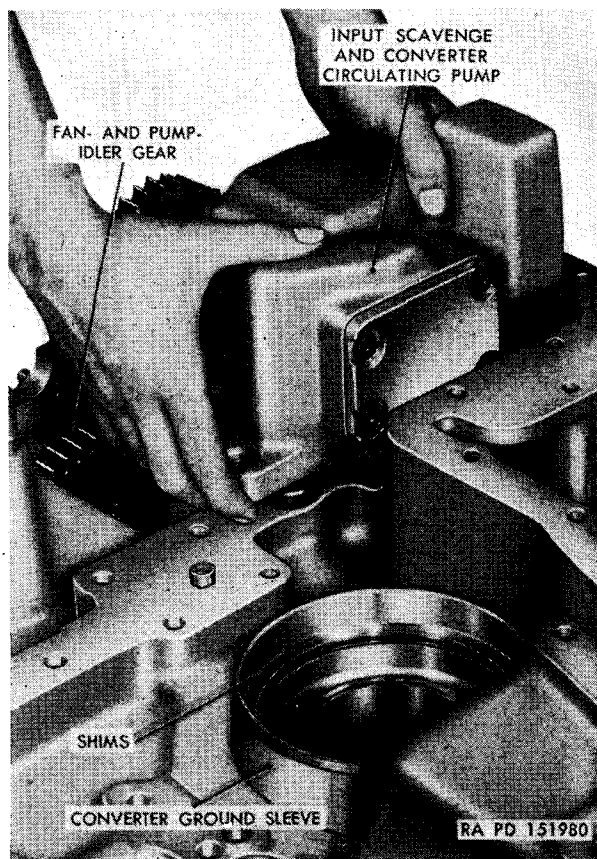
Removing or installing input-scavenge and converter circulating pump assembly.
